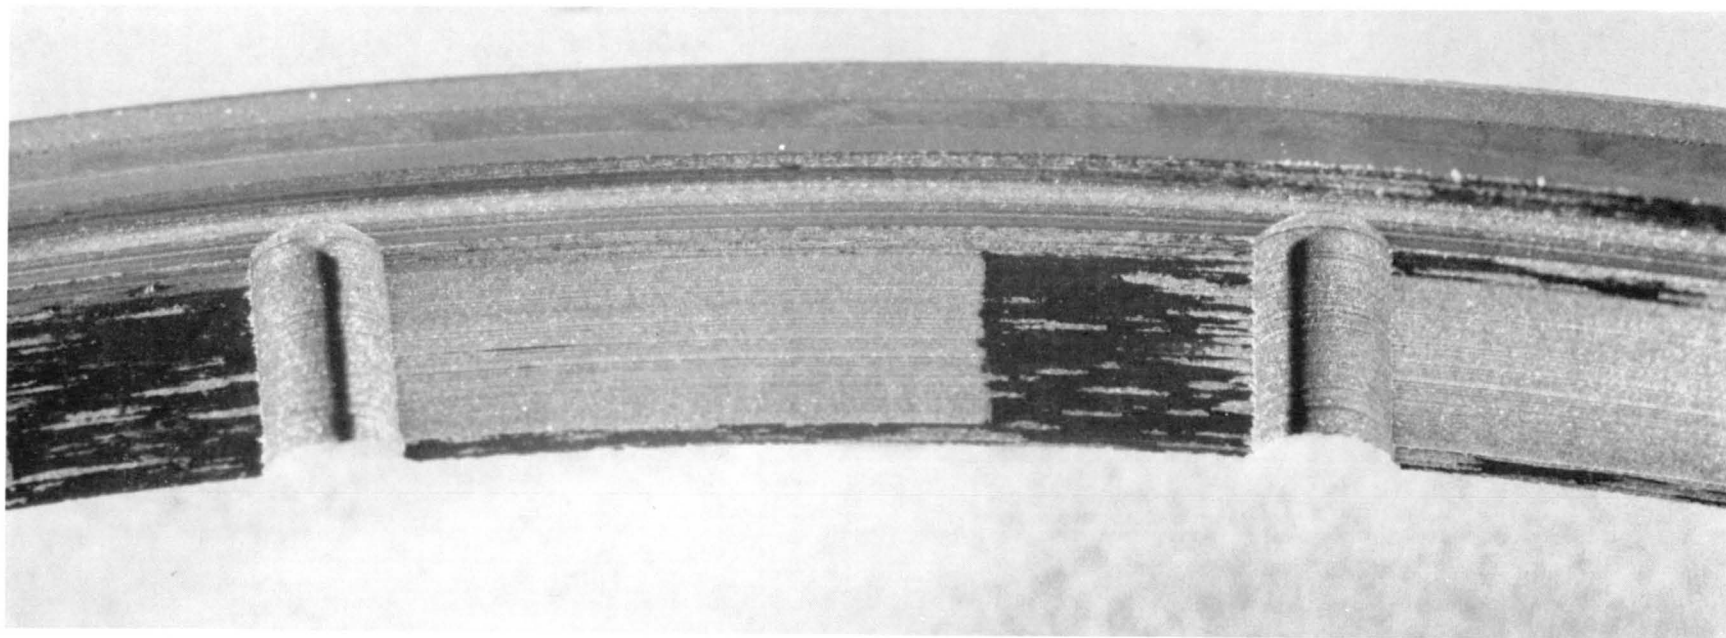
Helium Seal, Typical Turbine Side Carbon Ring 99RS006215, S/N 04, Posttest 490, Build 23 After 11.34 Hours
